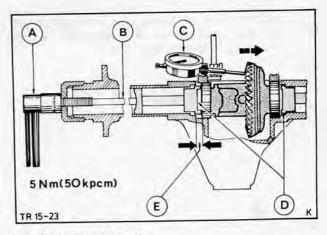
A - Torque wrench B – Spindle 15–021 C – Dial indicator
